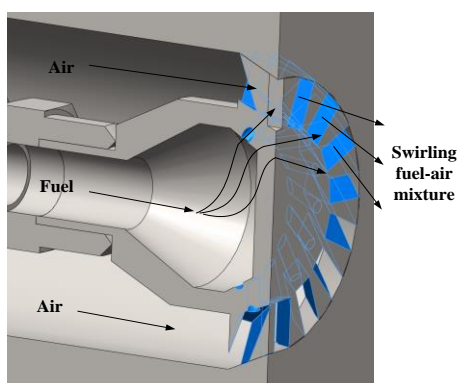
Cross-sectional view of fuel nozzle. Fig. 2.2e Direct photo of tested fuel nozzle.
